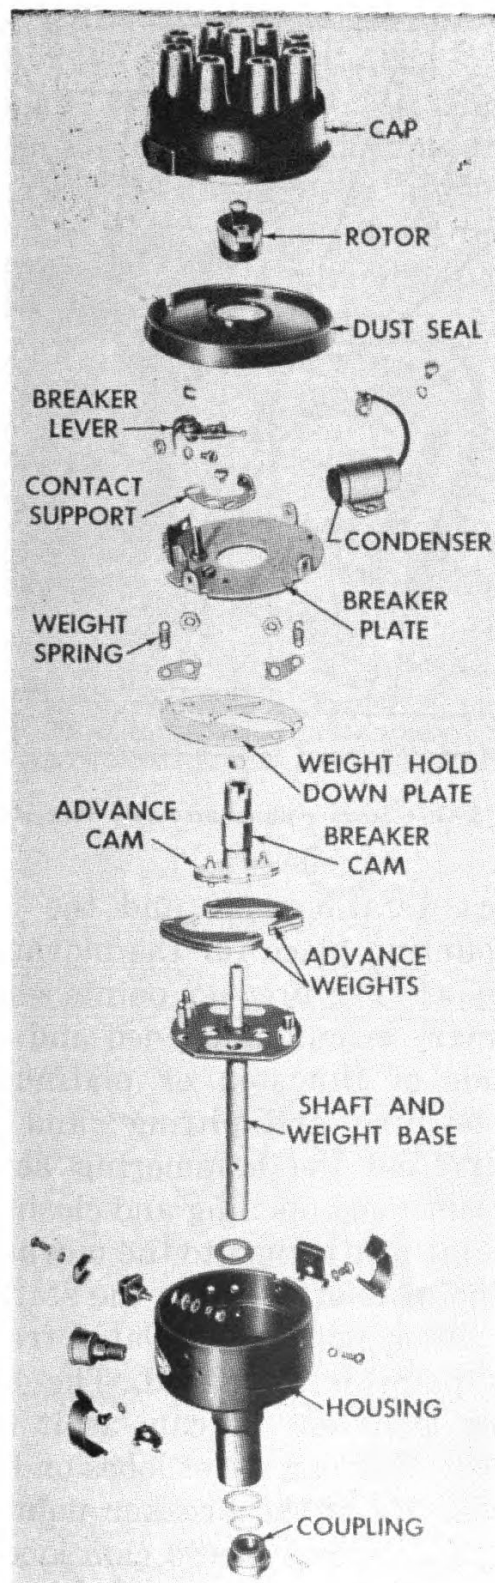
Exploded view of a distributor (General Motors Corporation, Delco-Remy).
